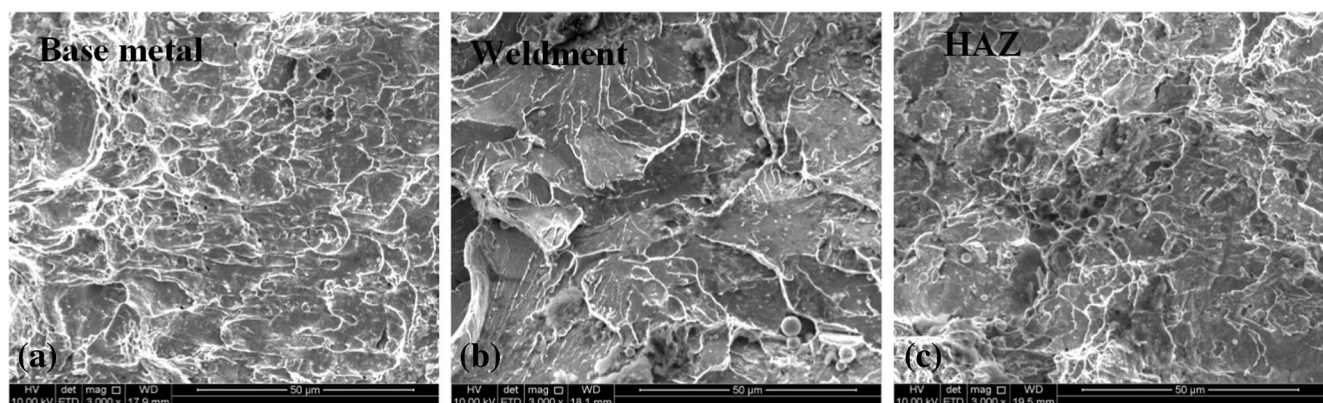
Morphology of the impact fracture surface. a Base metal. b Weldment. c HAZ
